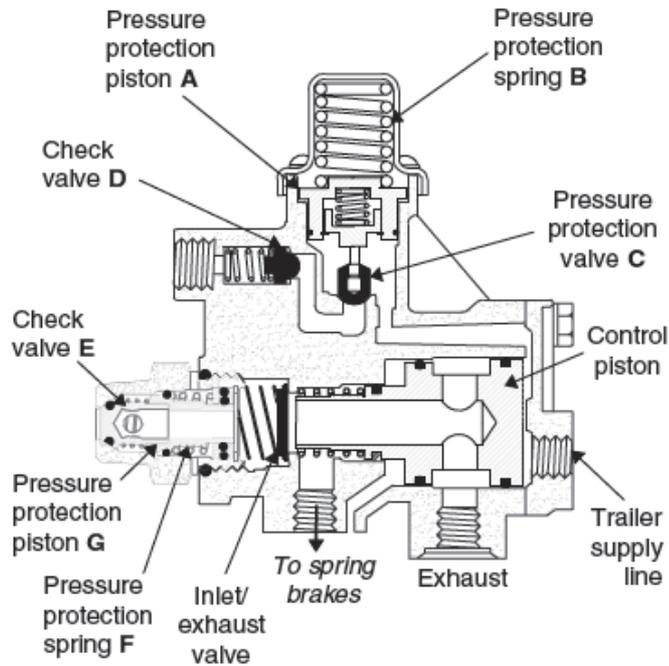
ABV3802 Spring Brake Control Valve – Cross Sectional View
